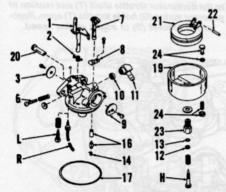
Exploded view of typical Tecumseh float type carburetor used on some models.
